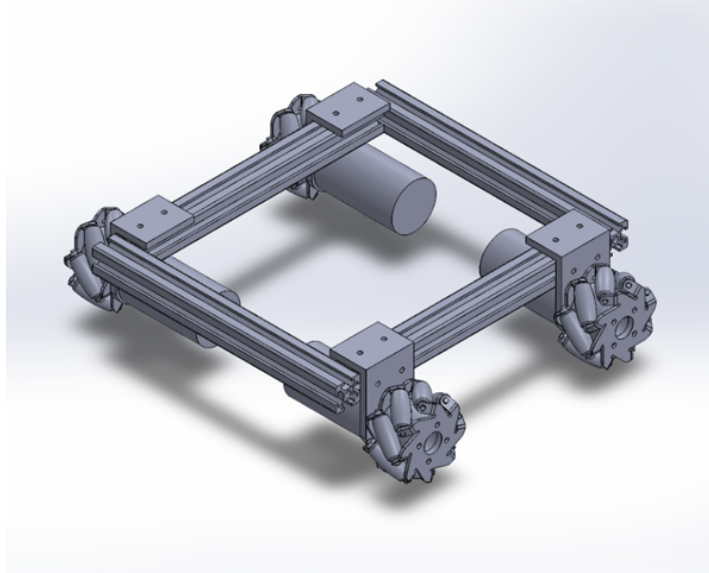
CAD model of first prototype drivetrain by John McClain
